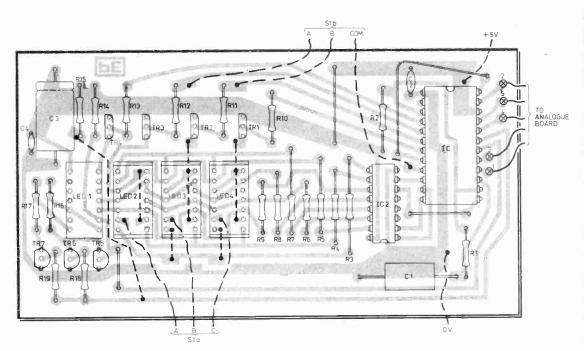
Component layout and external connections, Links and connections shown in broken line are made on the copper side of the board
